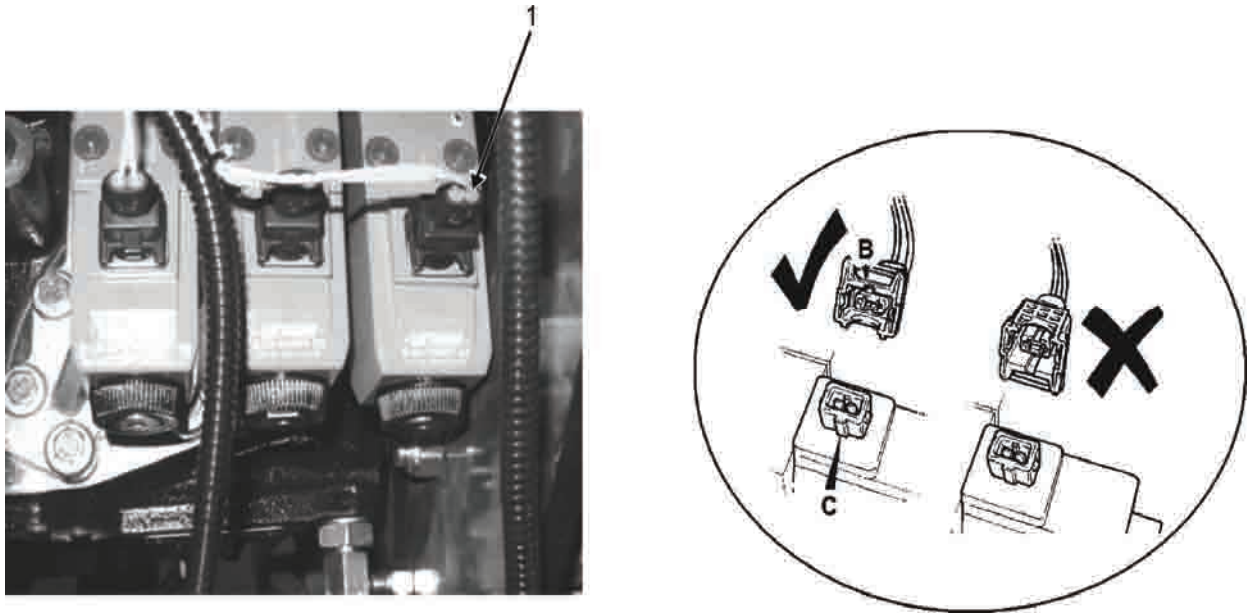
Solenoid Wiring Connector (Removal and Installation)
